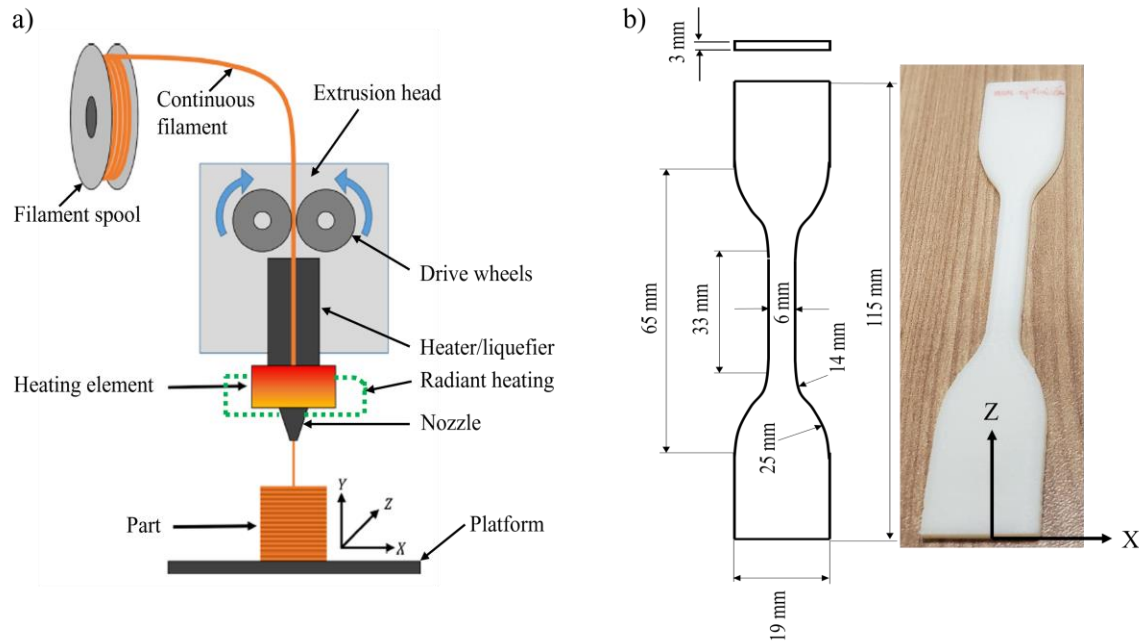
a) Principle of the fused deposition modeling (FDM) technique with a radiant heating (adapted from [3]) and b) Printed ABS specimens
